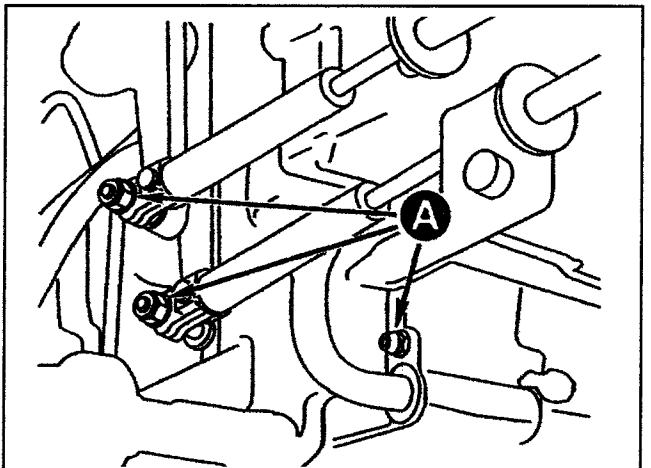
Control and shift cable lubrication points- carbureted 120-300 Hp (2000/3000/4000cc) V4/V6/V8 Motors
